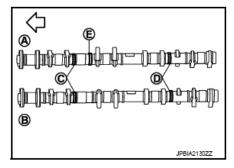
Identifying Identification Marks On Camshaft (EXH) Courtesy of NISSAN MOTOR CO., U.S.A.
